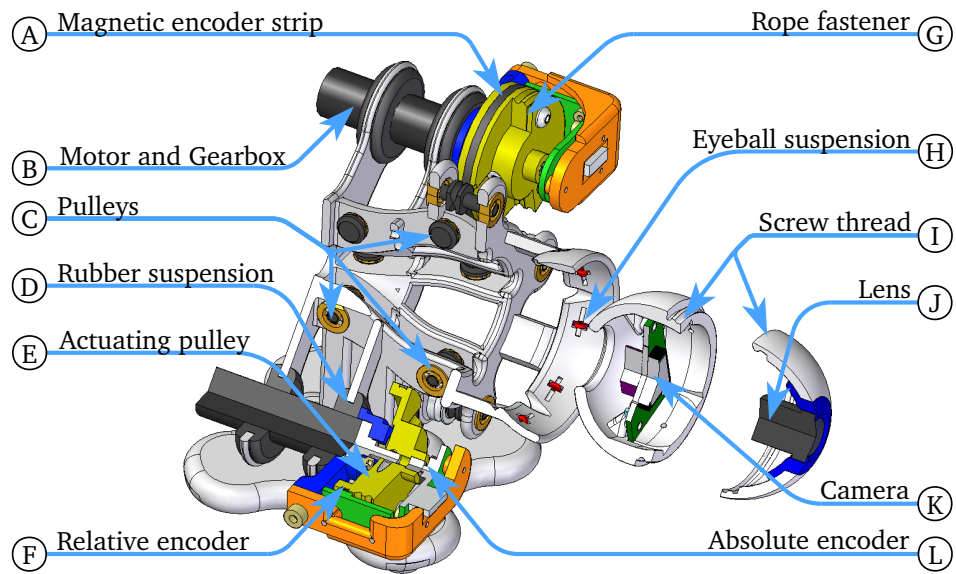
Dissected CAD view of the tendon eye prototype.
